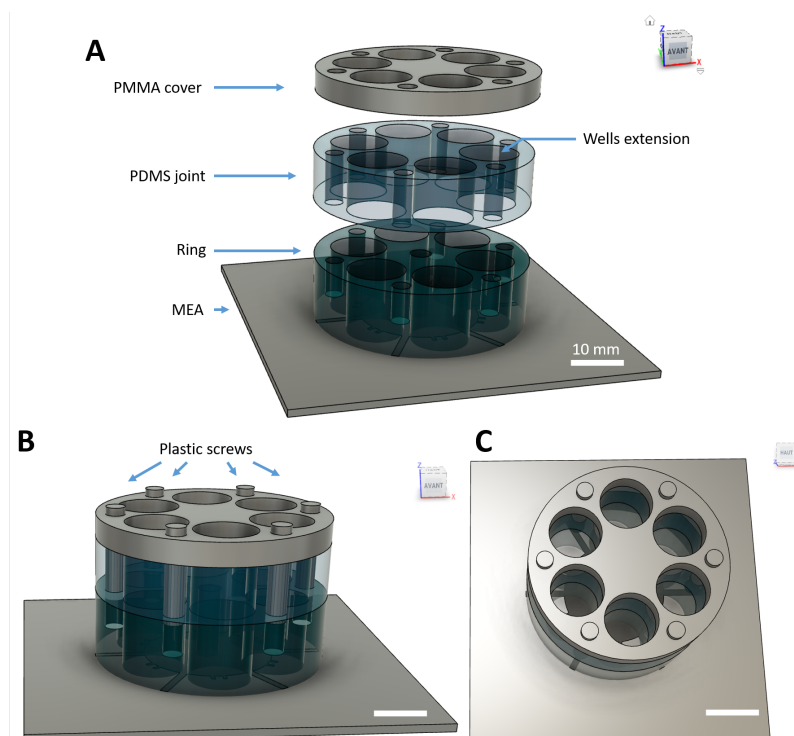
CAD views of the chip design 1 in static mode. (A) Exploded view and description of the system components. (B) Chip view when the cover is screwed. (C) Top view of the CAD model showing the deep wells created by the PDMS disk.
